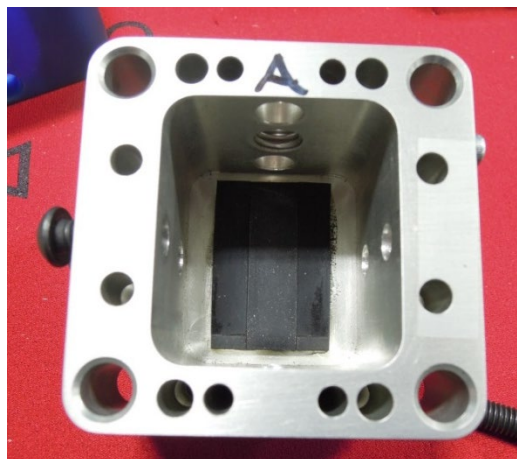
Rubber buffer inside the aluminum tibia bottom segment
